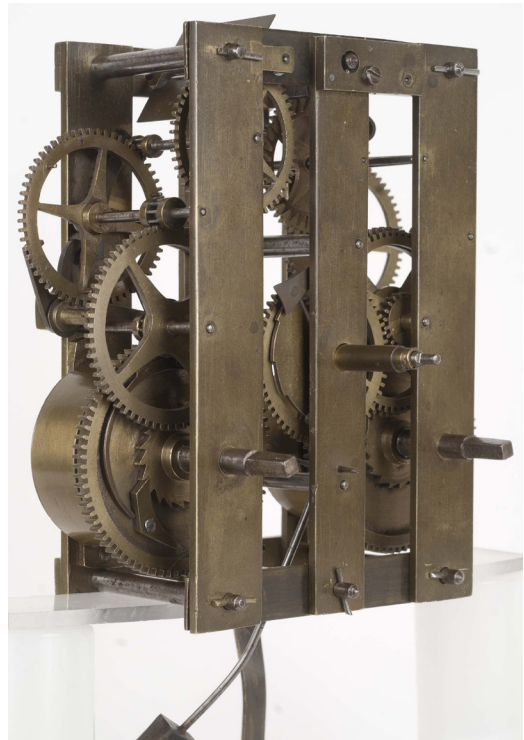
A $\frac{3}{4}$ left front movement view showing the front strip plate assembly and a view of the striking train. Note a number of plugged holes, barely visible
